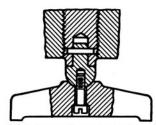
This is another adaptation of the methods used in Figs. 177-179. A ball end is pinned fast in the retaining screw, which acts like a swivel for the clamping shoe, the latter being held in place by a small fillister head screw in an oversize hole. The swiveling permits the shoe to accommodate itself to rough or uneven surfaces.
